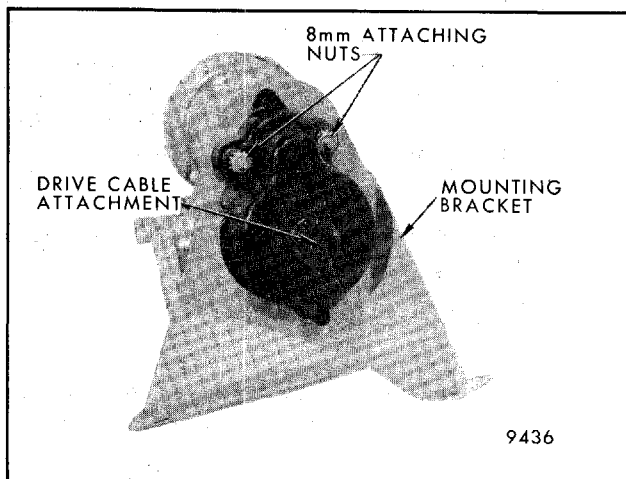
Drive Motor and Gear Reduction Unit
